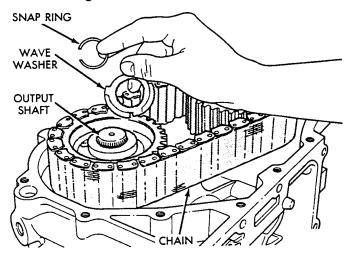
Remove Output Shaft Sprocket Snap Ring and Wave Washer
